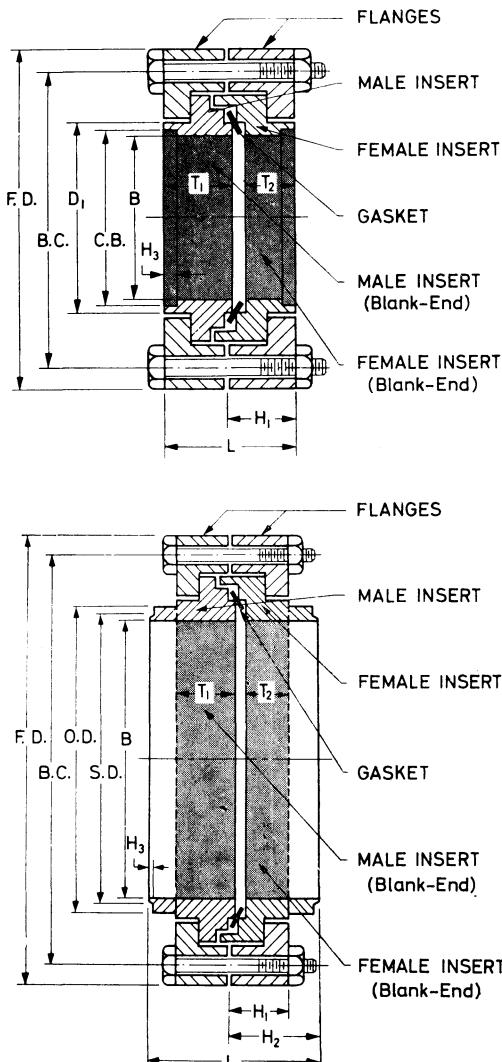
A Flange joints with Seal-Vac shear seals; see Table 3.38.A (*Courtesy of Ultek^{1251a}*)
